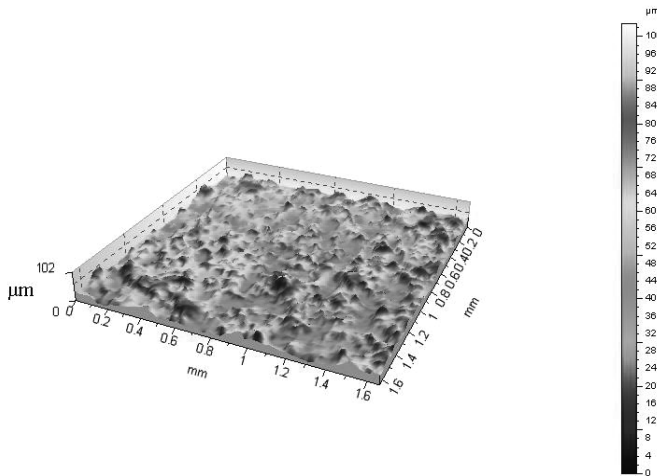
Three dimensional surface microgeometry of the WC-Co-Al₂O₃ coating deposited
